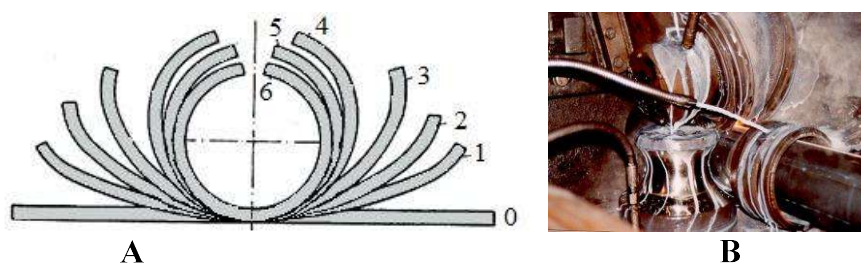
Technological process of A) pipe formation and B) pipe welding
